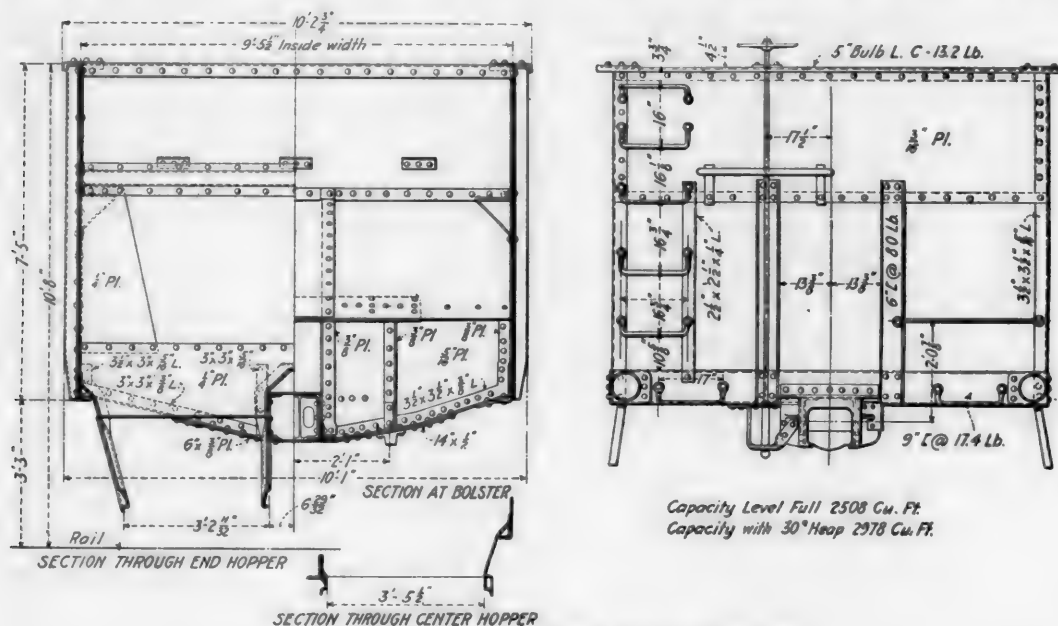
Sections of the Standard 70-Ton Hopper Car
